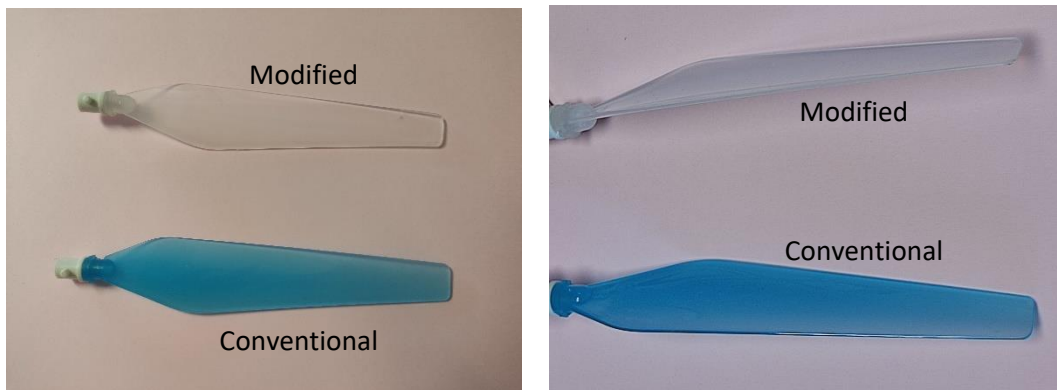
View of the conventional and modified blade for the testing wind turbine (left side: front view; right side: side view)
